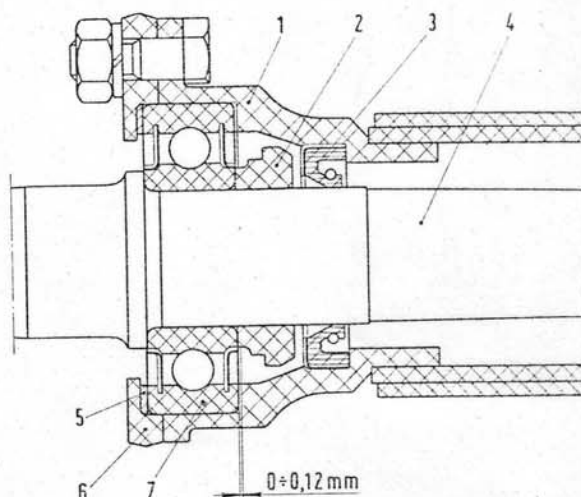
Scrap view of rear axle housing and axle shaft bearing side section.
